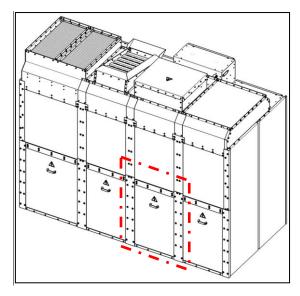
4-panel arrangement with rear wall and rear ledges closed (as an example)
